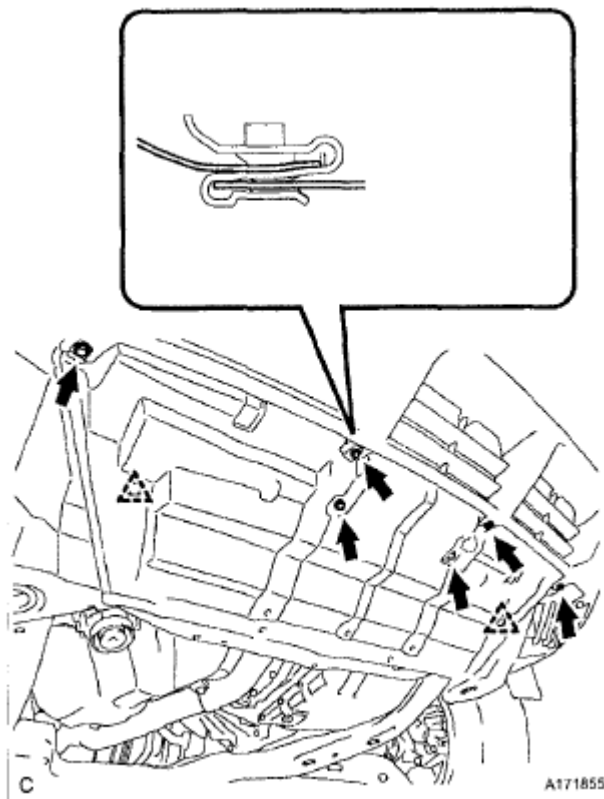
Locating No. 1 Engine Under Cover, Bolt And Clips
